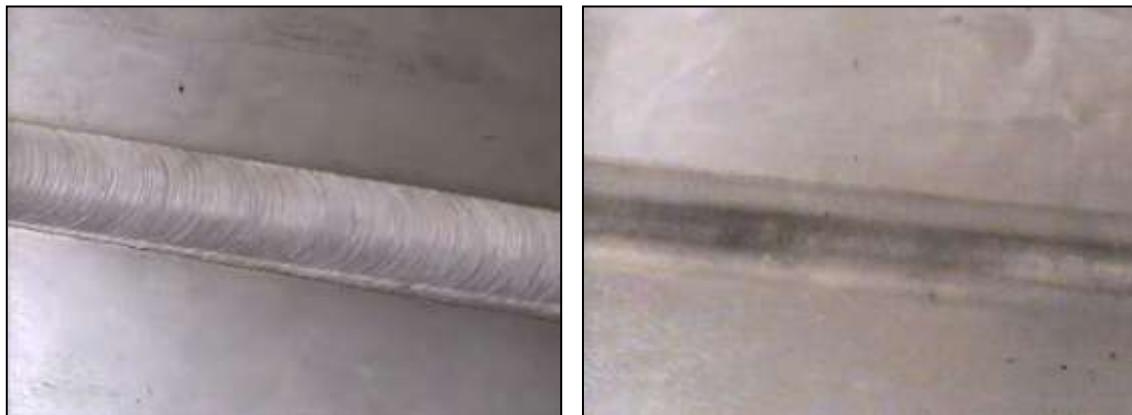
Results produced by the third concept tool. Figure illustrating the surface finish of the face and root weld respectively.
